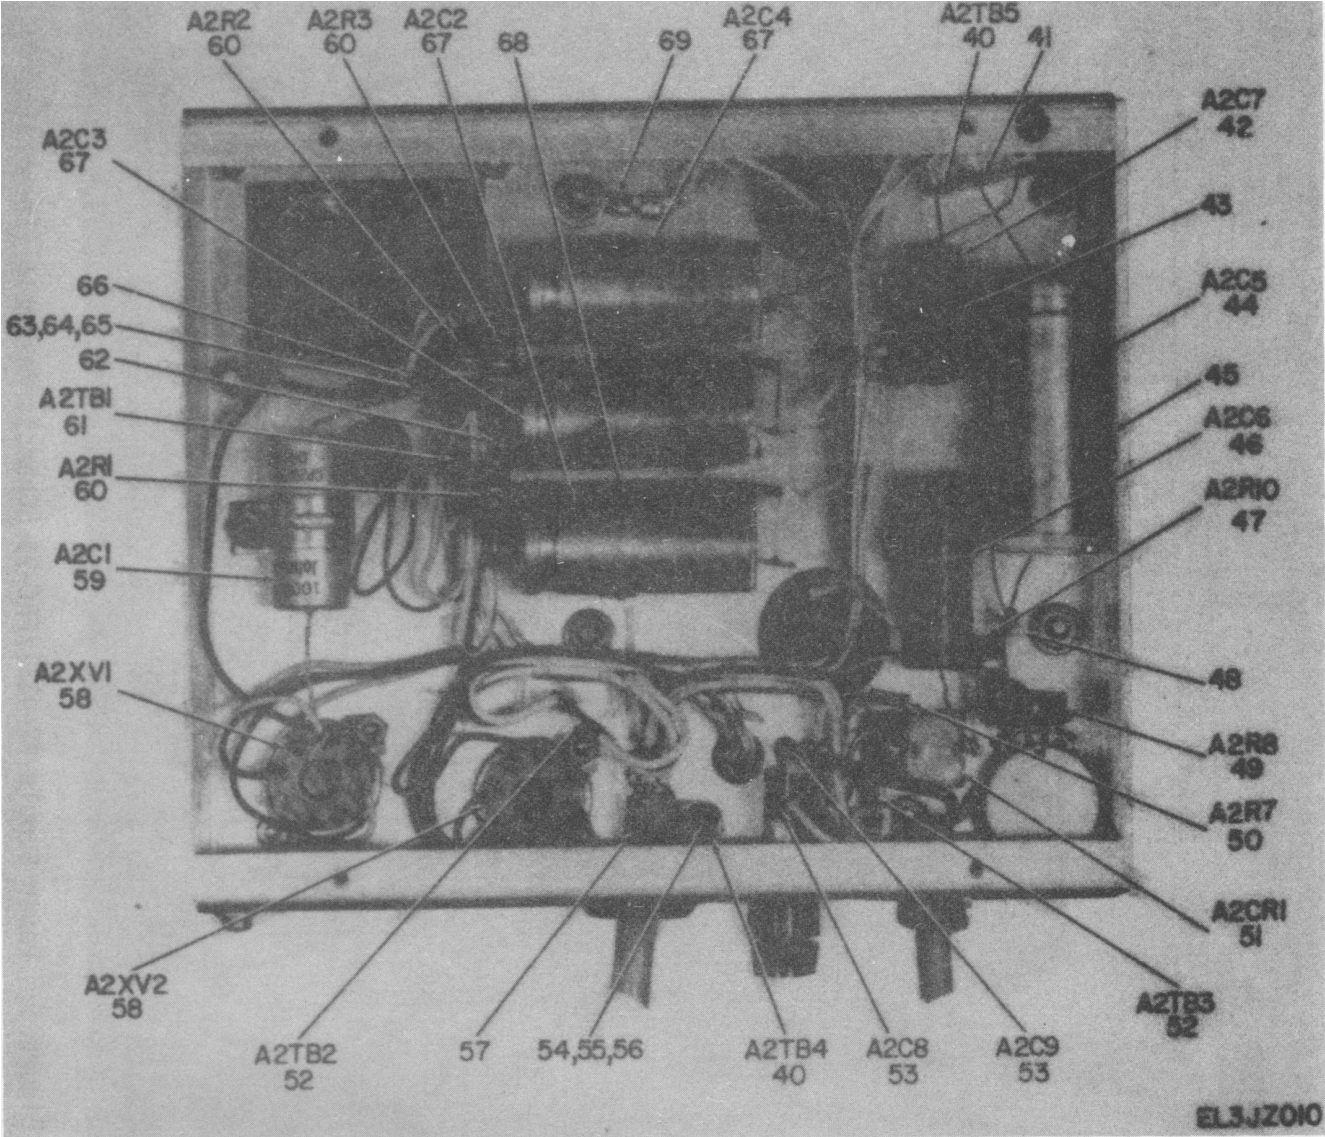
Power Supply PP-4151/FRC-93, Chassis Assembly (Sheet 2 of 2).
